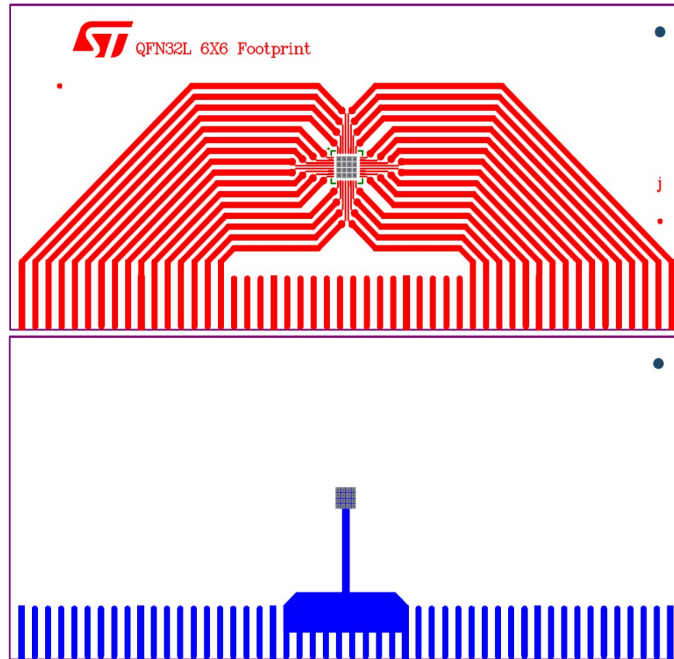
QFN (6x6 mm) PCB 2 cm<sup>2</sup>
